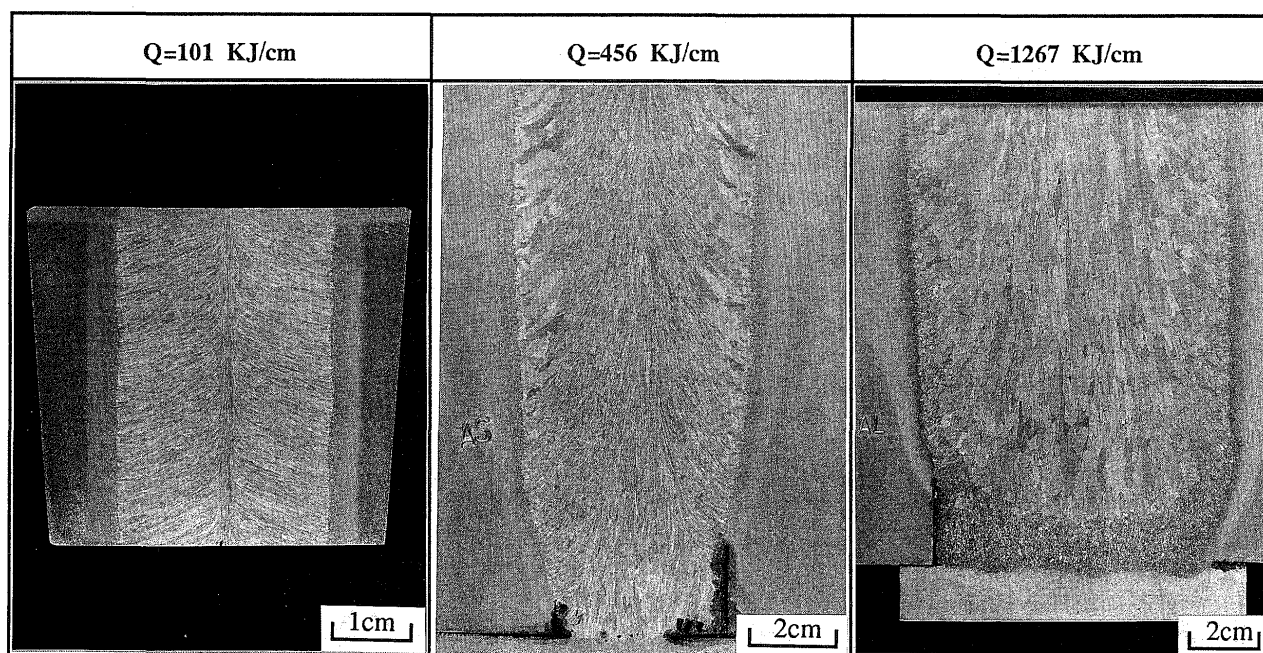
Longitudinal macrostructures of ES weld metal for represented heat input.
